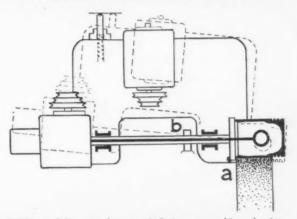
Schematic layout of Scrivener machine showing the principle of operation.
